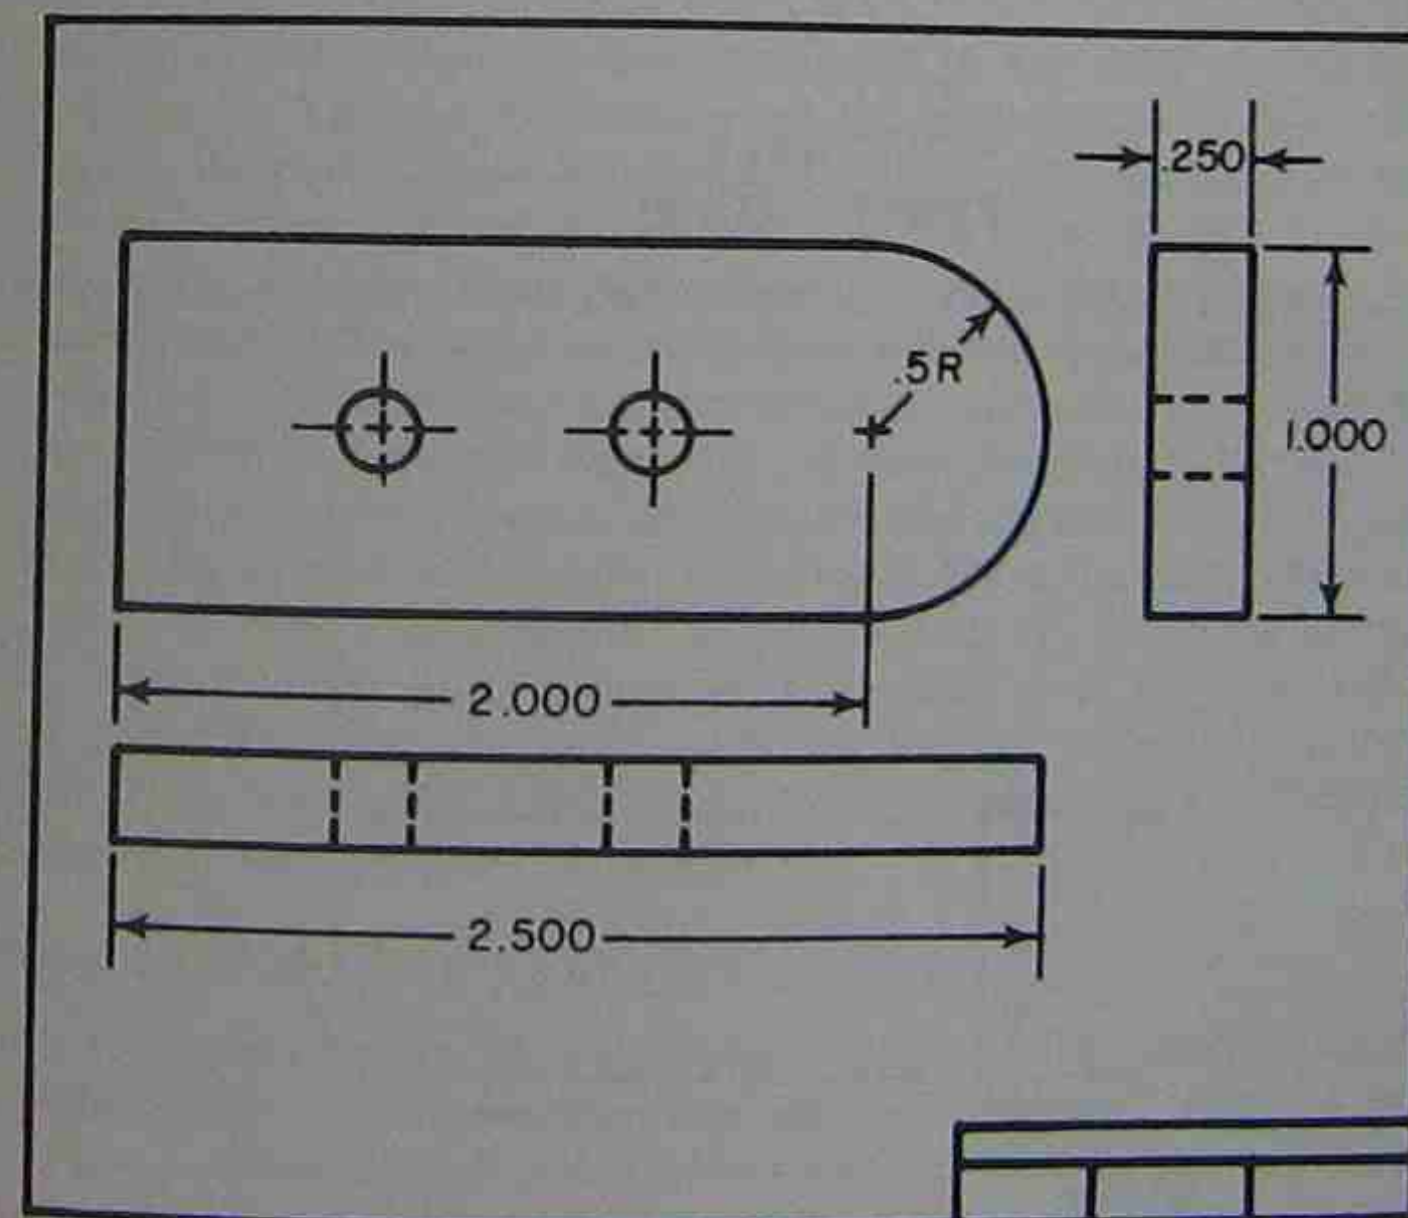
Engineering drawing describing part to be machined. The two holes shown are for holding the part and are drilled prior to NC machining.
